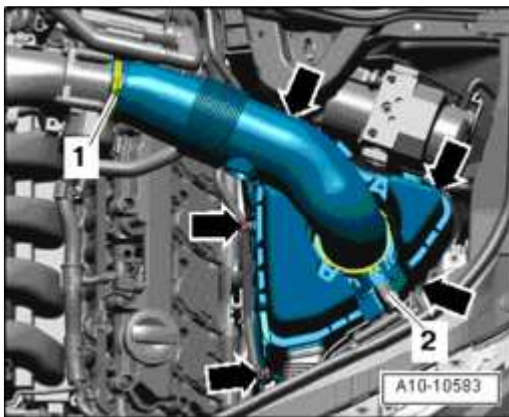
Mass Air Flow (MAF) Sensor 2 G246 Electrical Connector, Intake Manifold Air Duct Hose & Air Filter Housing Bolts
